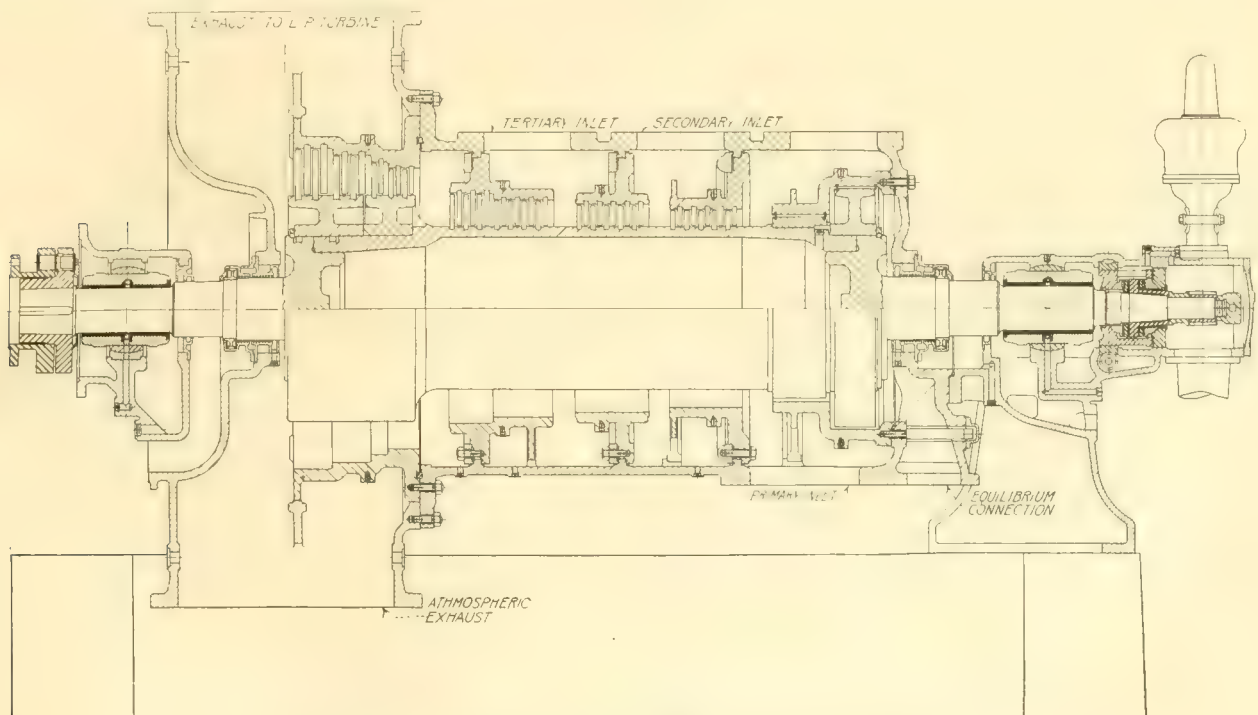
SECTION THROUGH THE HIGH-PRESSURE SINGLE-FLOW TURBINE
